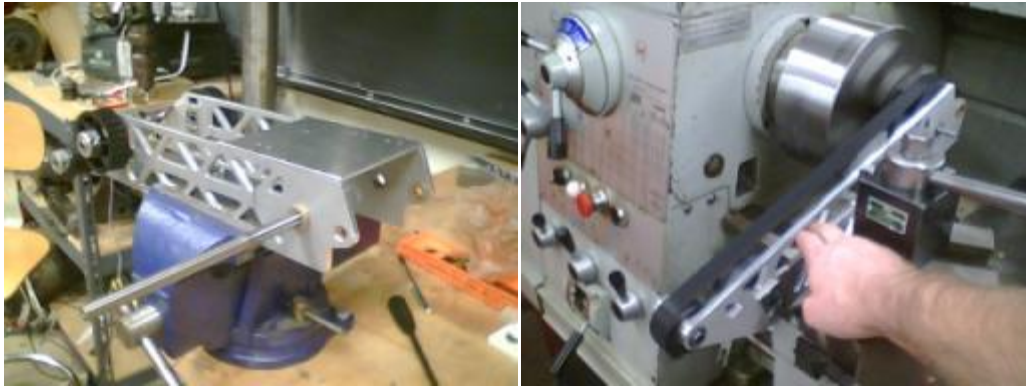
Reaming poor tolerance bushings (left) and seating bearings and shafts (right)
